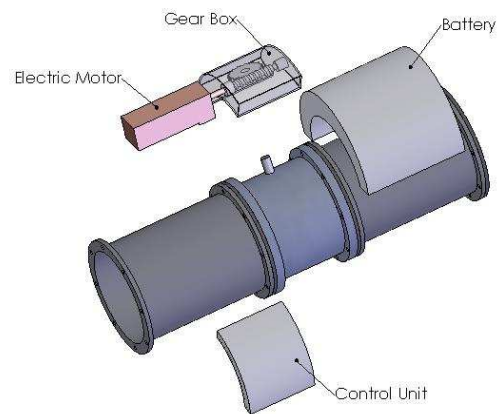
Assembly of battery, control unit and gear train sub-assembly
